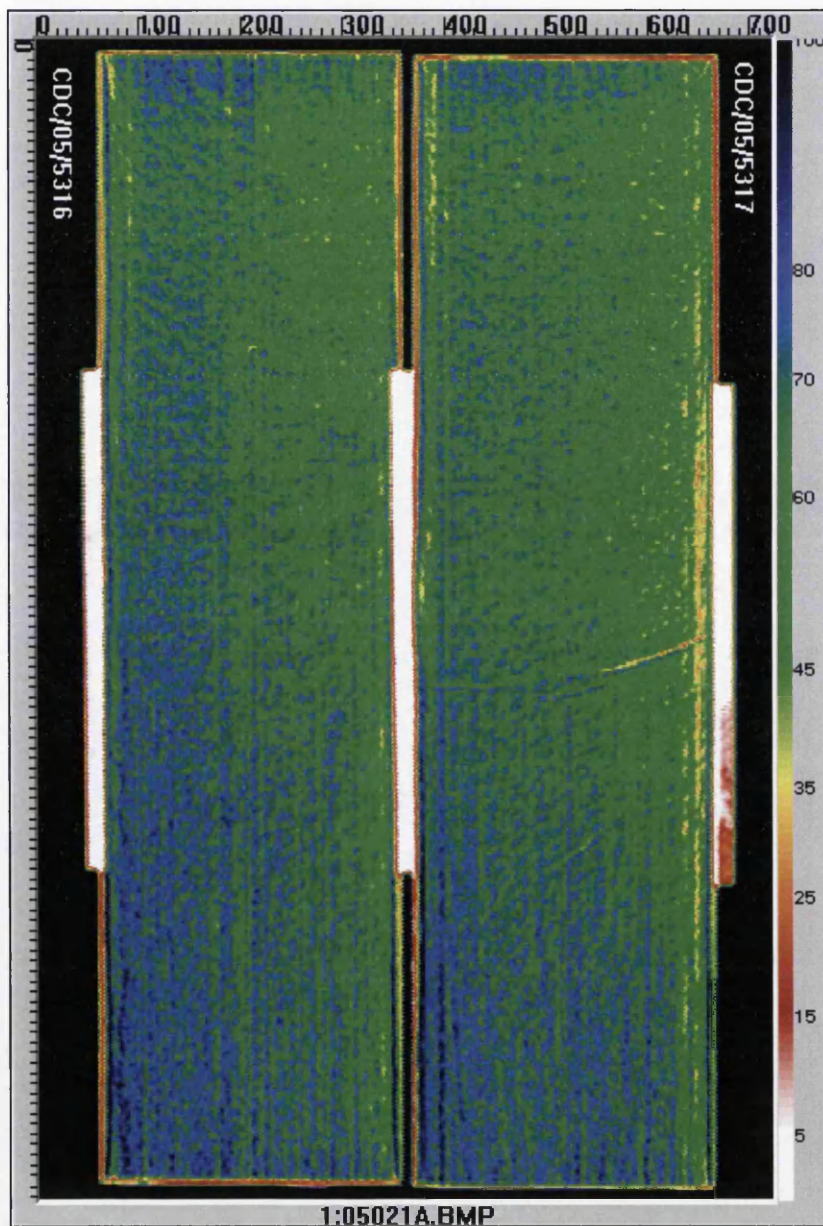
CDC/05/5316 was used to manufacture interlaminar shear coupons.
